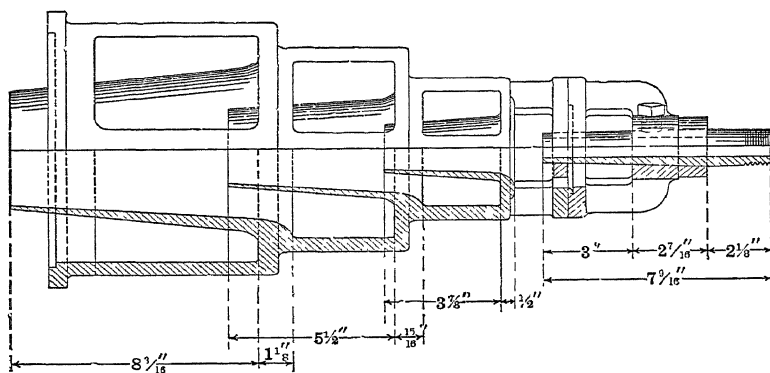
DETAILS OF STEAM BLOWER, HUGHES PRODUCER.
